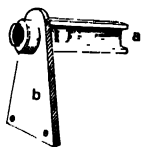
Connection of tooth bar to tooth-bar standard.
